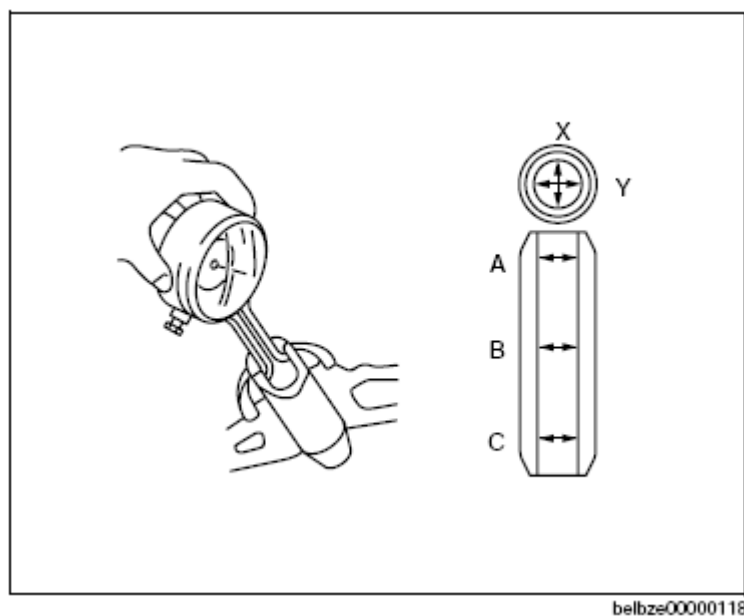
Measuring Inner Diameter Of Each Valve Guide In X And Y Directions At Three Points (A, B, And C)
